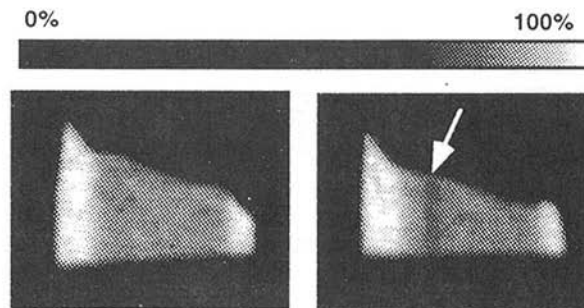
LAM/DE CT scans of fractured specimen cut from a failed MMC ring
